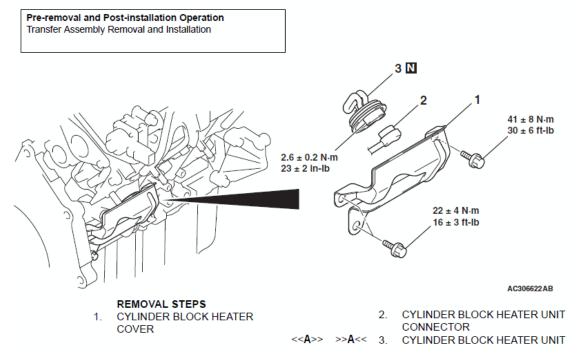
Cylinder Block Heater Unit Components With Torque Specifications Courtesy of MITSUBISHI MOTOR SALES OF AMERICA.
